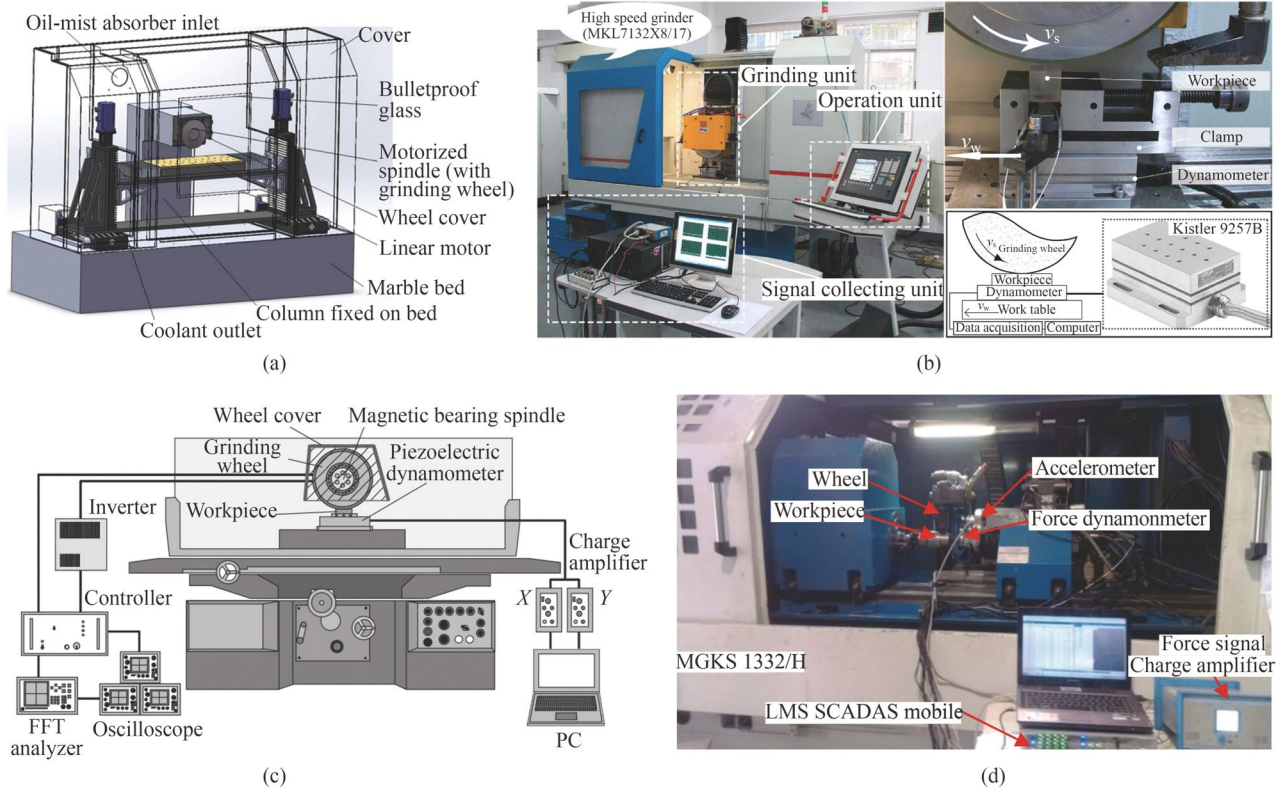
Several types of HSG grinder a double-column HSG grinder [147], b zero multi-step HSG grinder, the max speed of the spindle of the machine tool reaches 10 000 r/min [45], c a grinding machine
